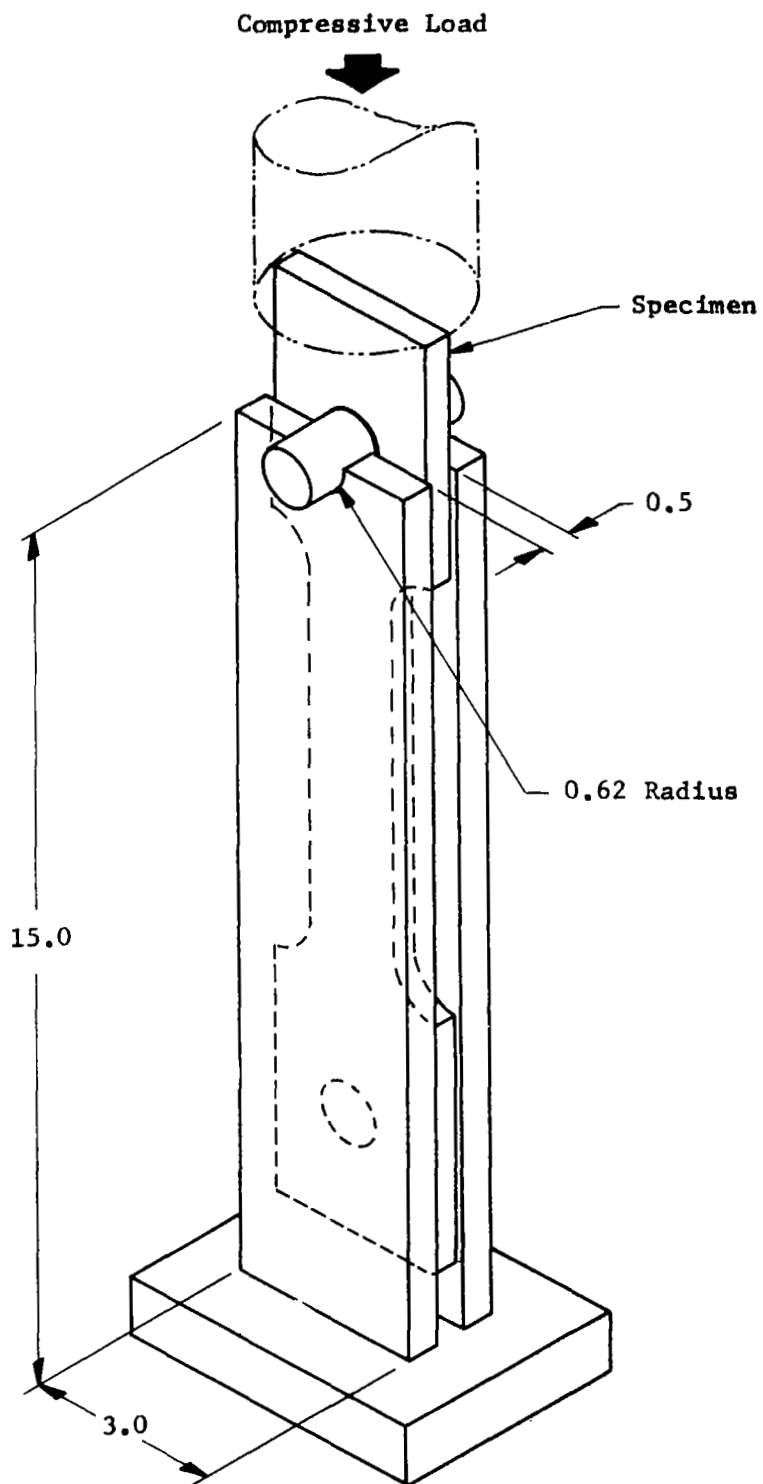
Fixture for Compressive Loading Specimen Loading Holes
